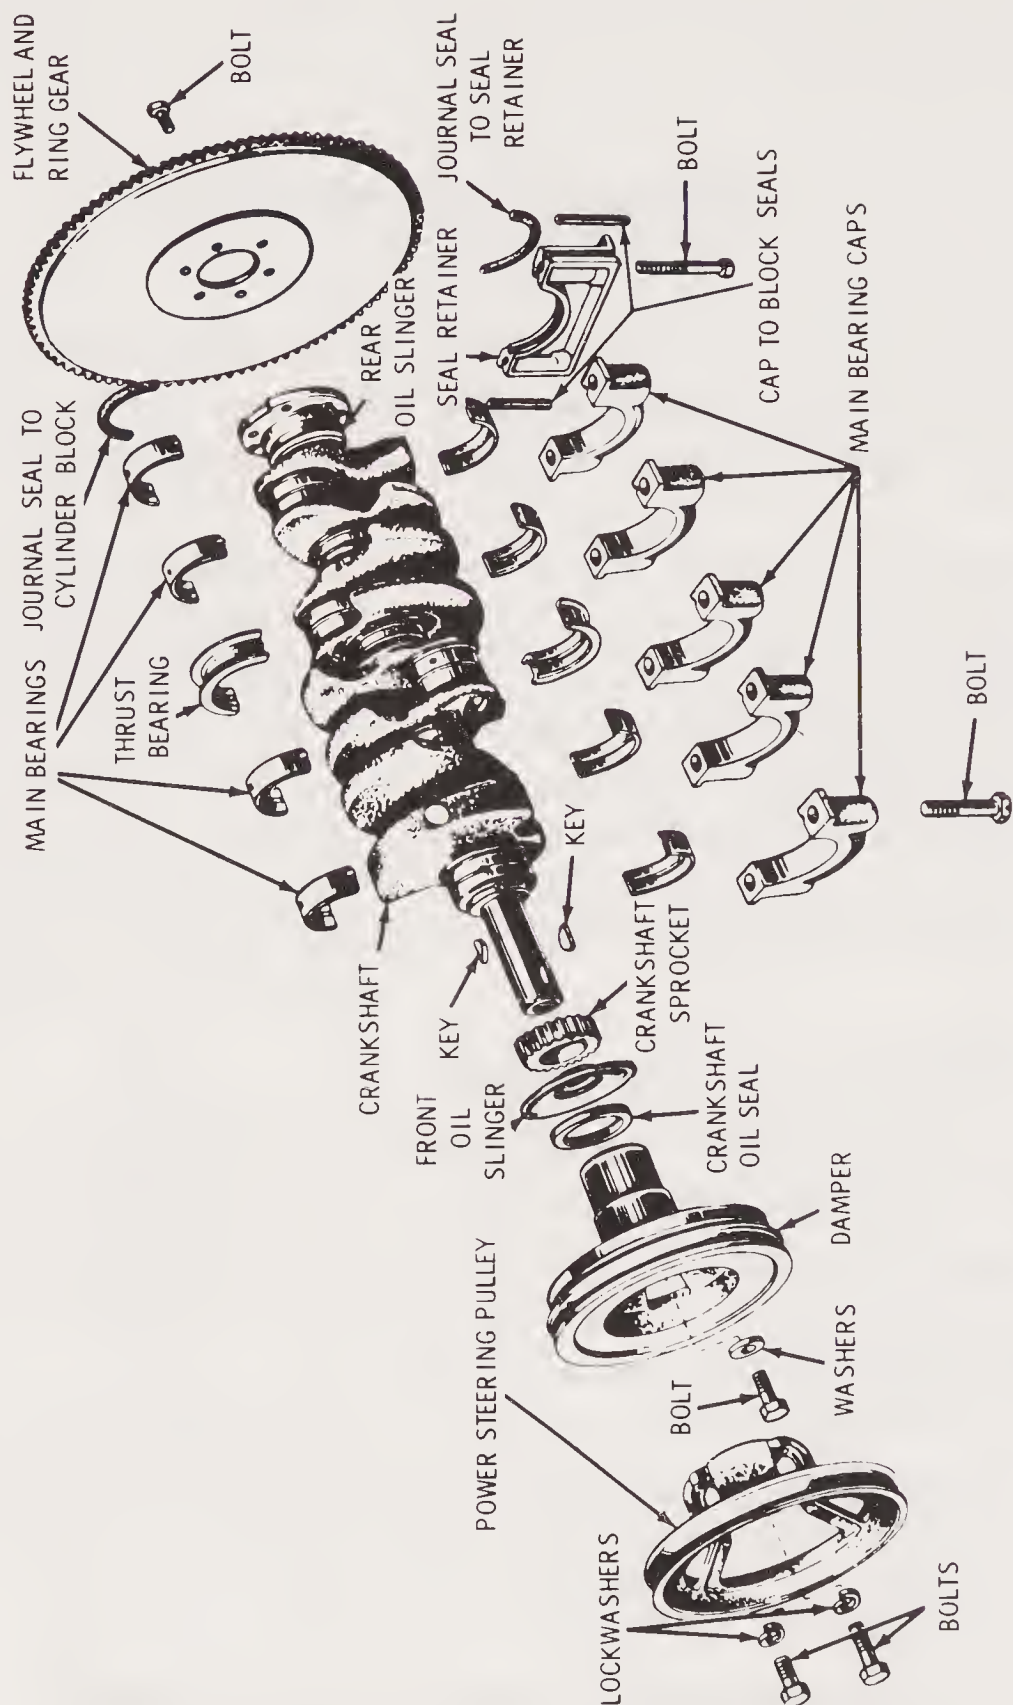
Typical automotive-type crankshaft and related parts.
